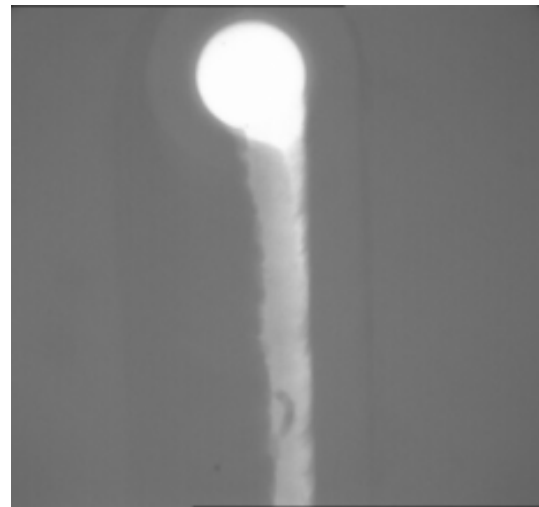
Wormhole defects along weld line of Aluminum Alloy 2011
